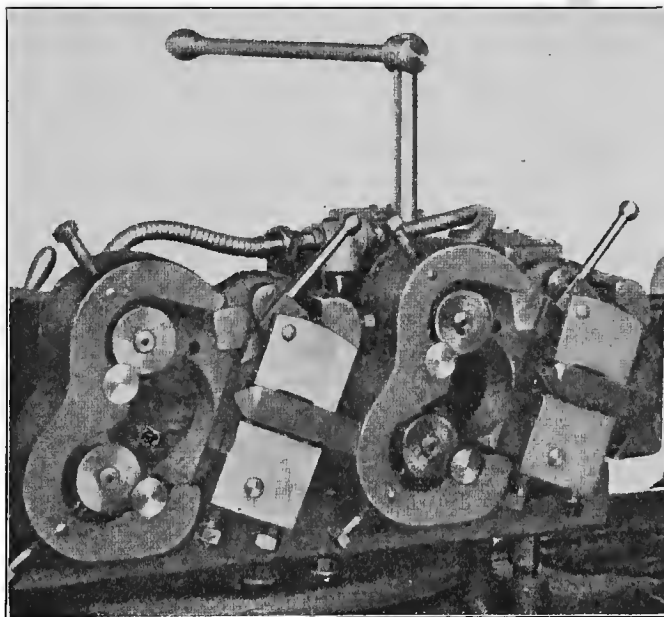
TOOLS FOR ROUGH-TURNING THE SHELL
